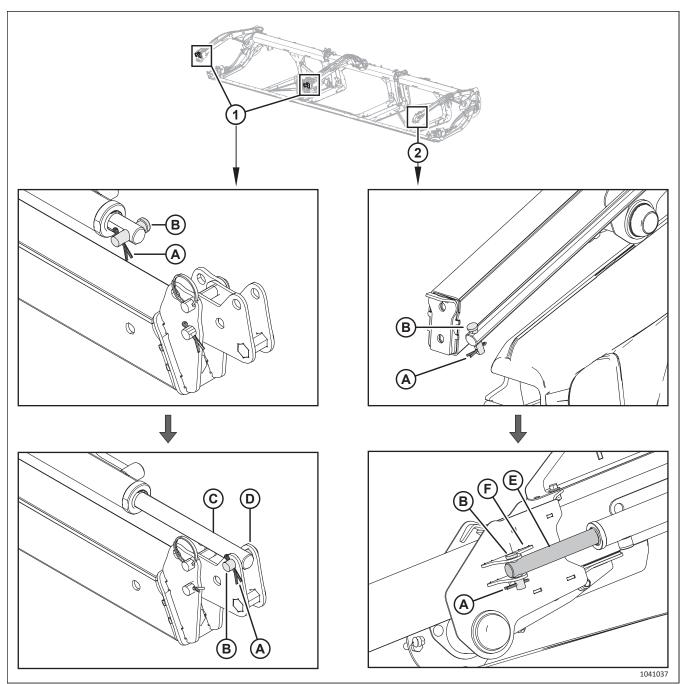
Double-Reel Fore-Aft Cylinder Rods
